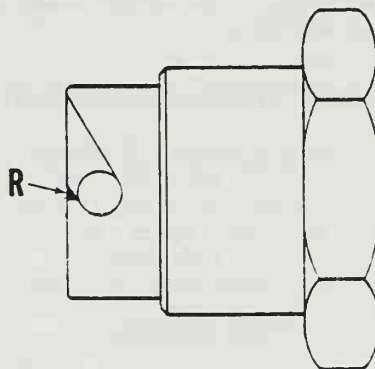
File away area (R) on crank jaw to dimensions shown for easier disengagement.
